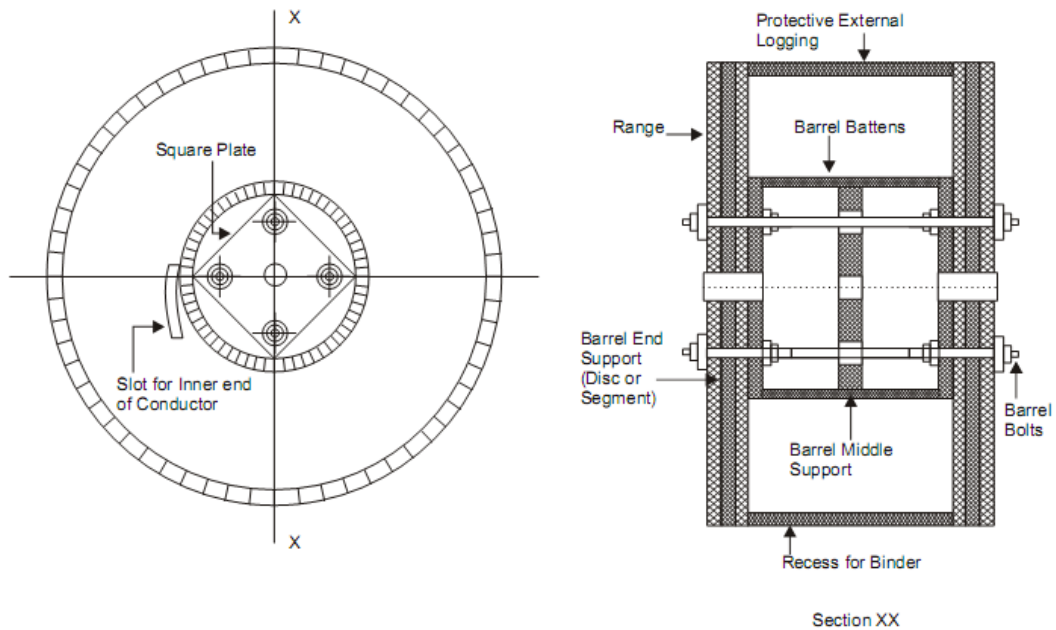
Drum having 3 ply flange construction with barrel middle supports.
